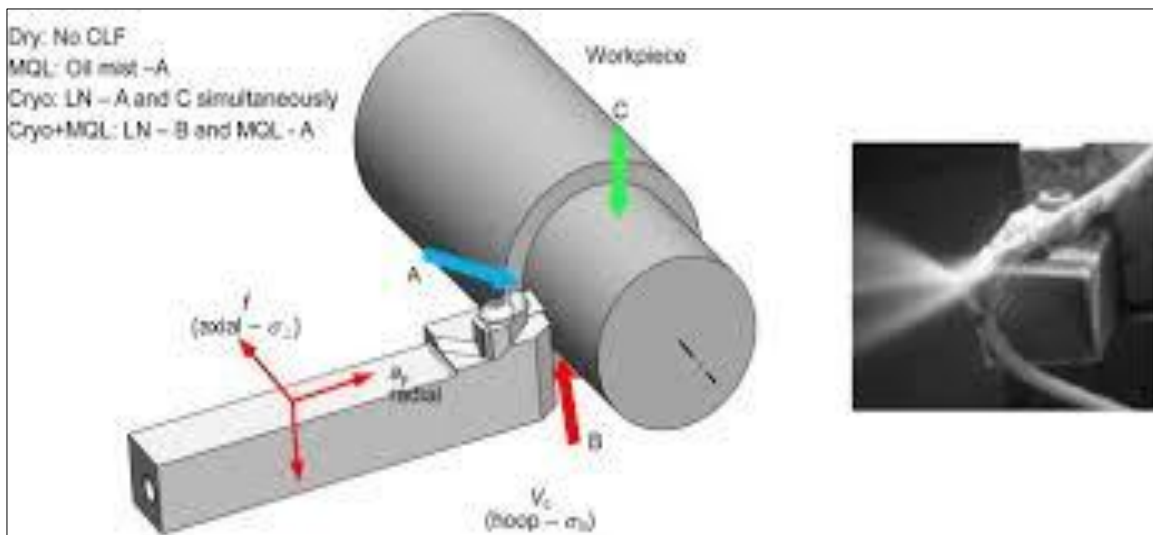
Feeding Tool Perpendicular to Axis of Workpiece.
